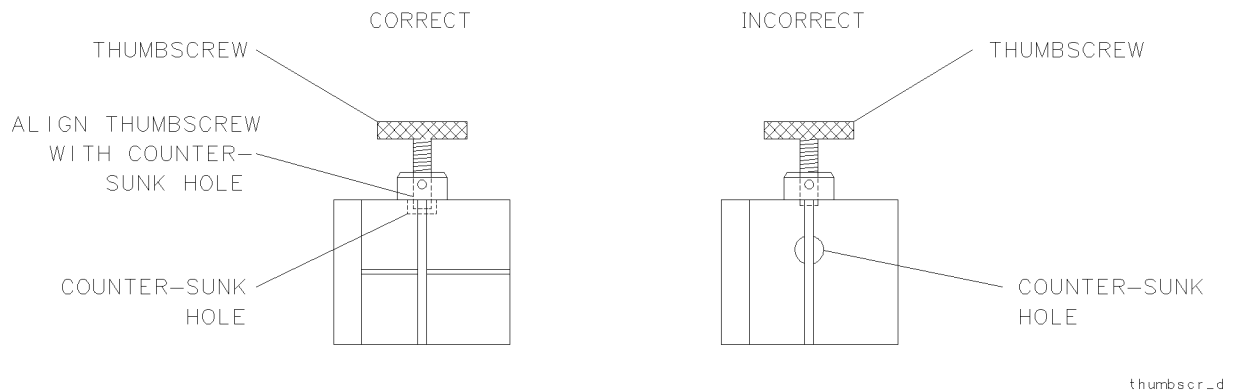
Aligning the Thumbscrew With the Counter-Sink Hole
